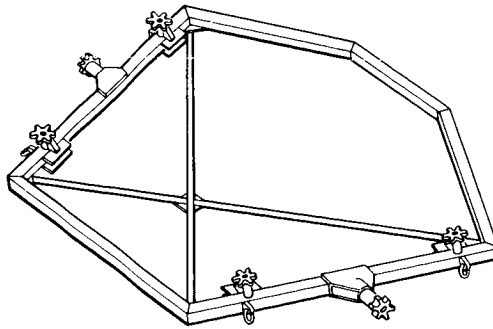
Assembly and Handling Frame, Solar Panel Segment
